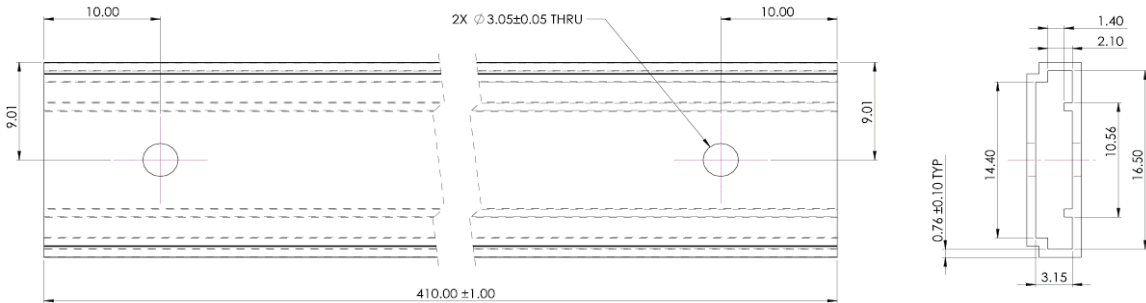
Tube dimensions for L2C5-xxxxxL04H09xx and L2C5-xxxxxL05FHBxx
